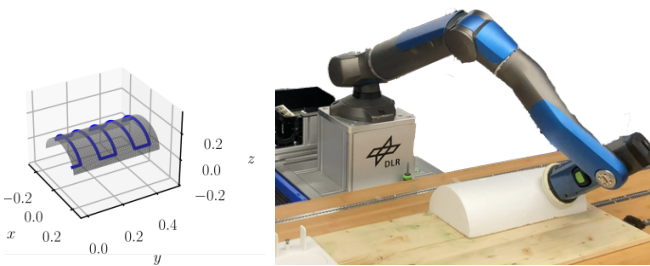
Processing strategy applied onto a half-cylindrical workpiece.
